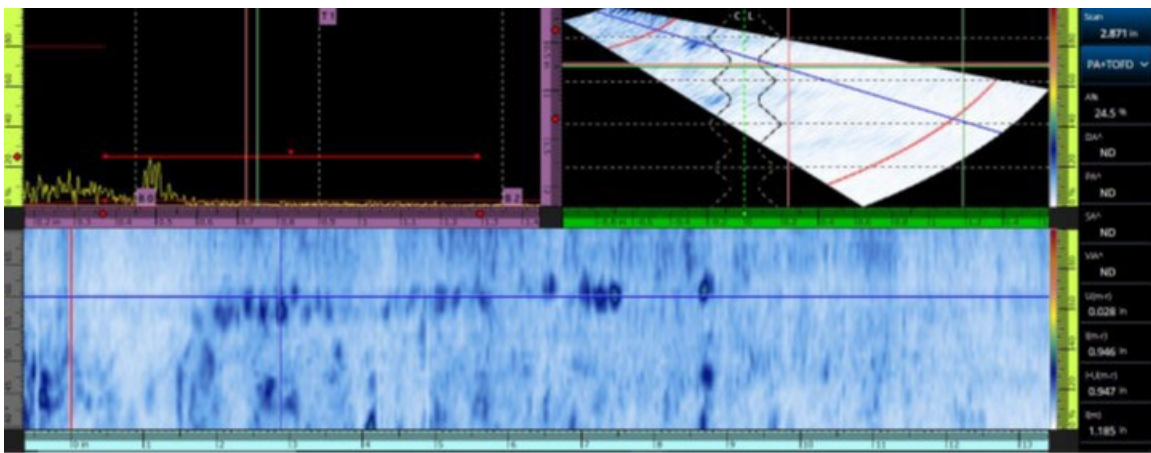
PAUT indication of defects at Locations A and B in fillet weld test panel TTCI-P2 from ID-encoded scan
